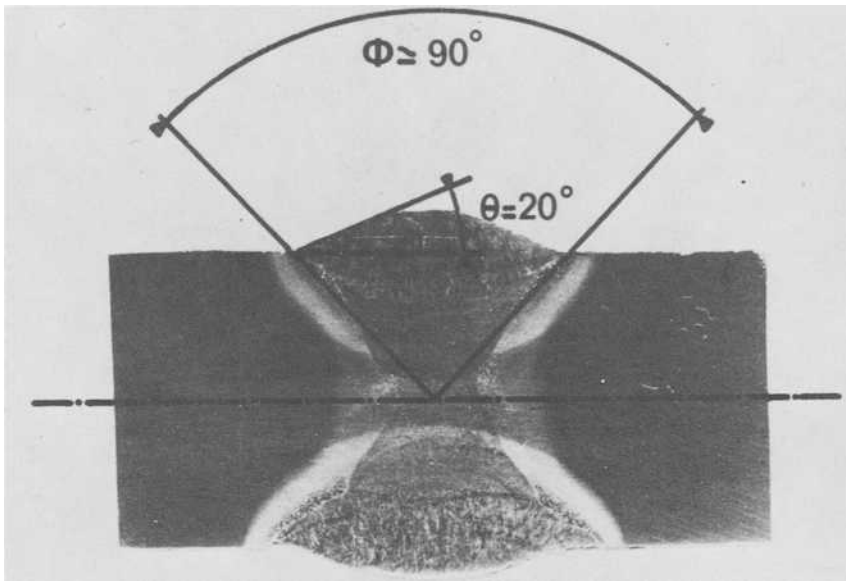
Welded joints—butt joints—manual arc welding.
